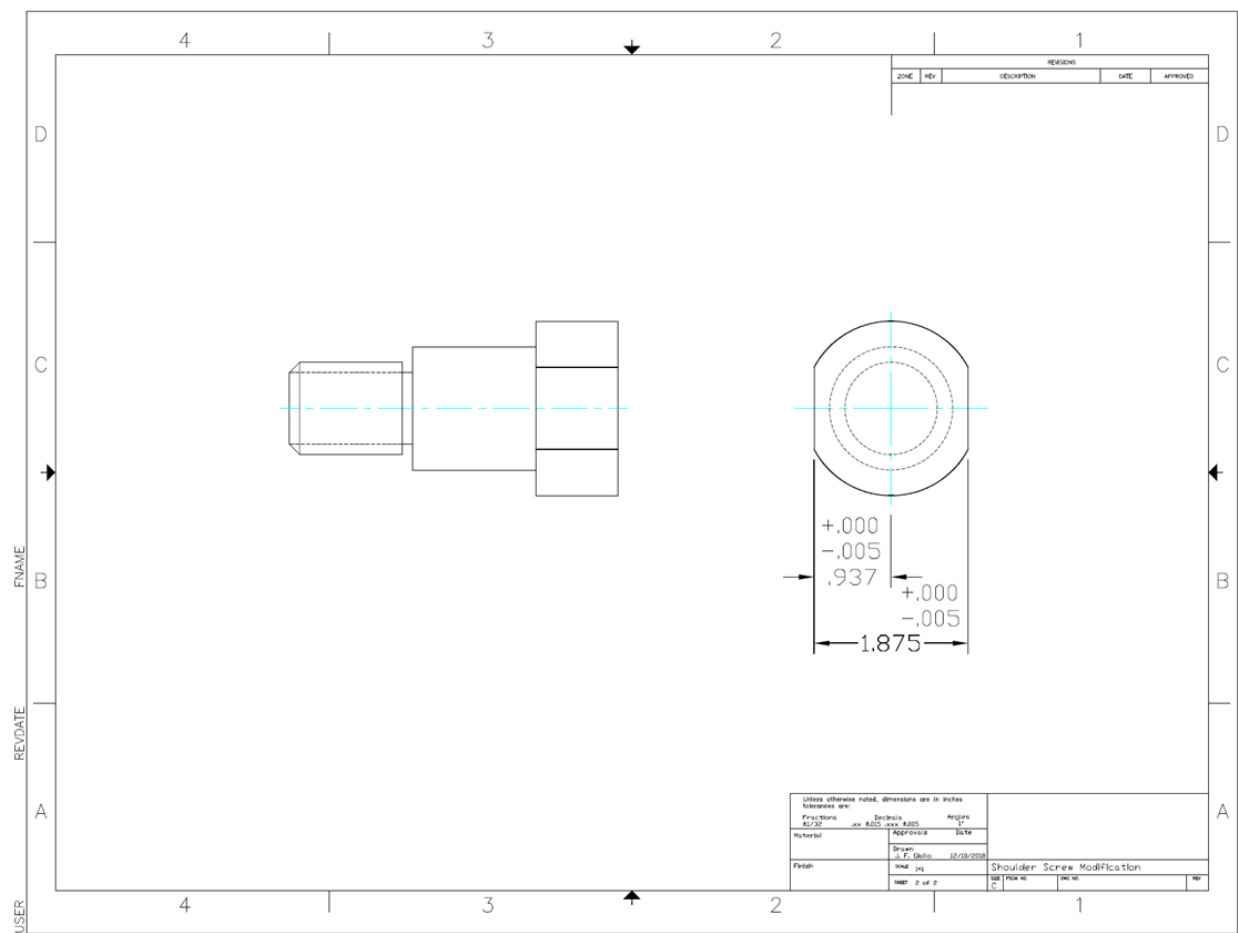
Shoulder bolt (pin) machinist as-built detail.
